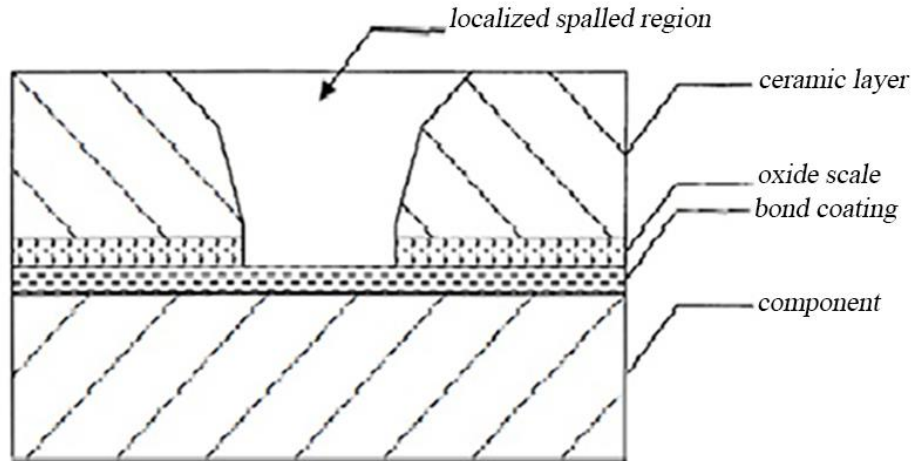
Cross-sectional side view of a typical TBC system [64].
